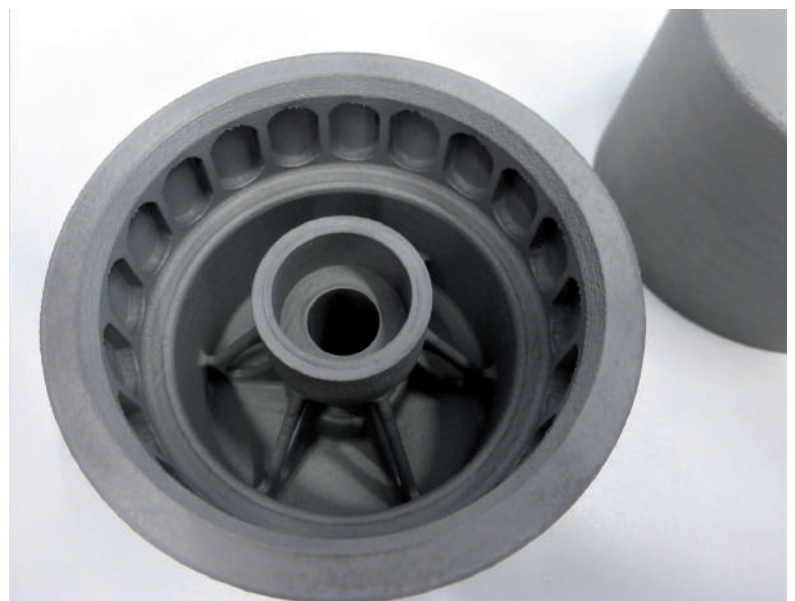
Stainless steel piston workpiece made by additive manufacturing
